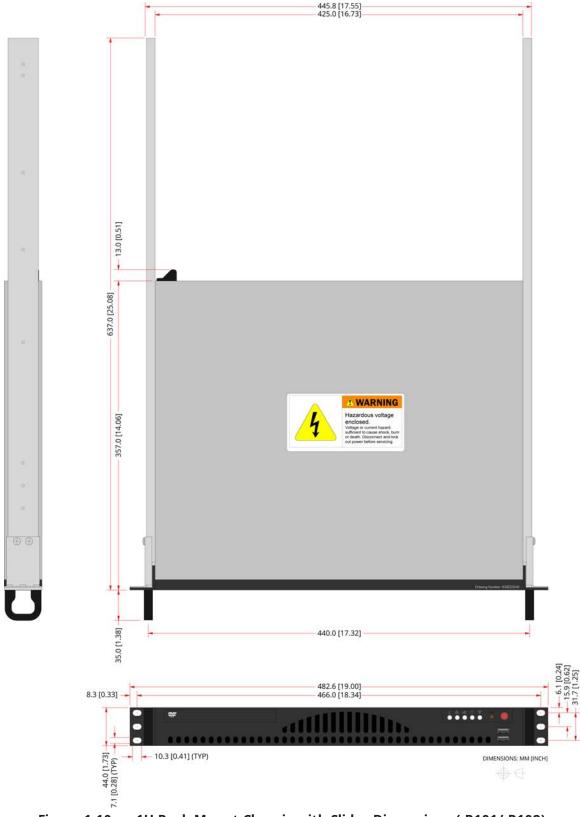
1U Rack Mount Chassis with Slides Dimensions (-R101/-R102)
